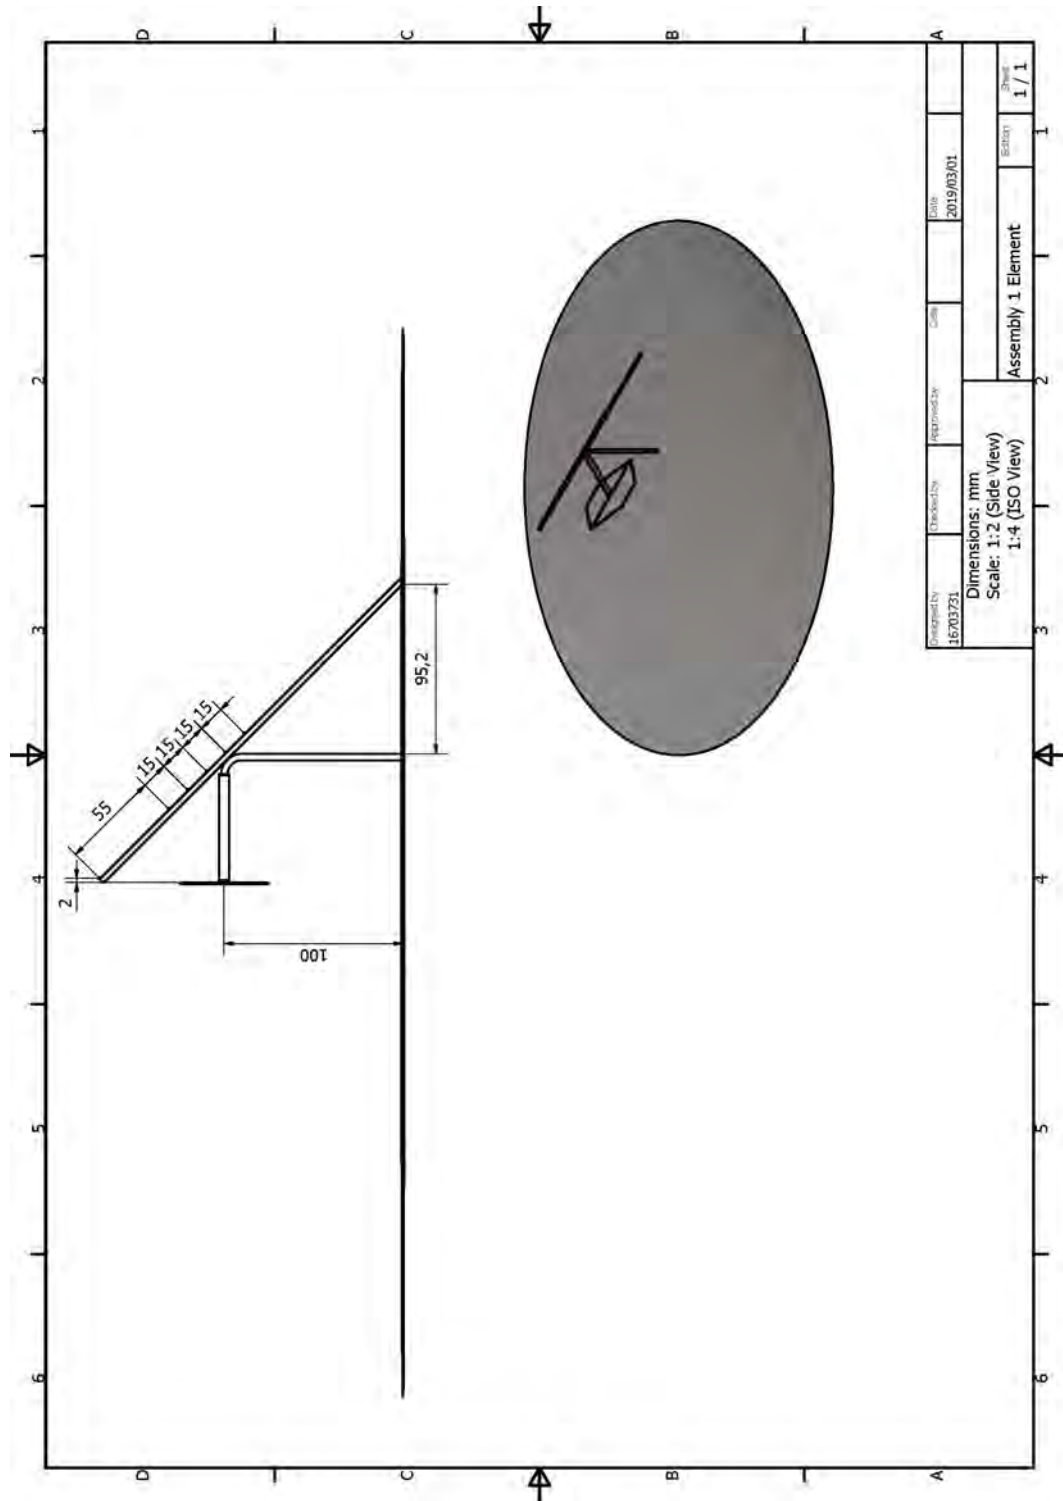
1:100 scale single element model assembly drawing. This engineering drawing shows the completed construction of the 1:100 scale single element model.
